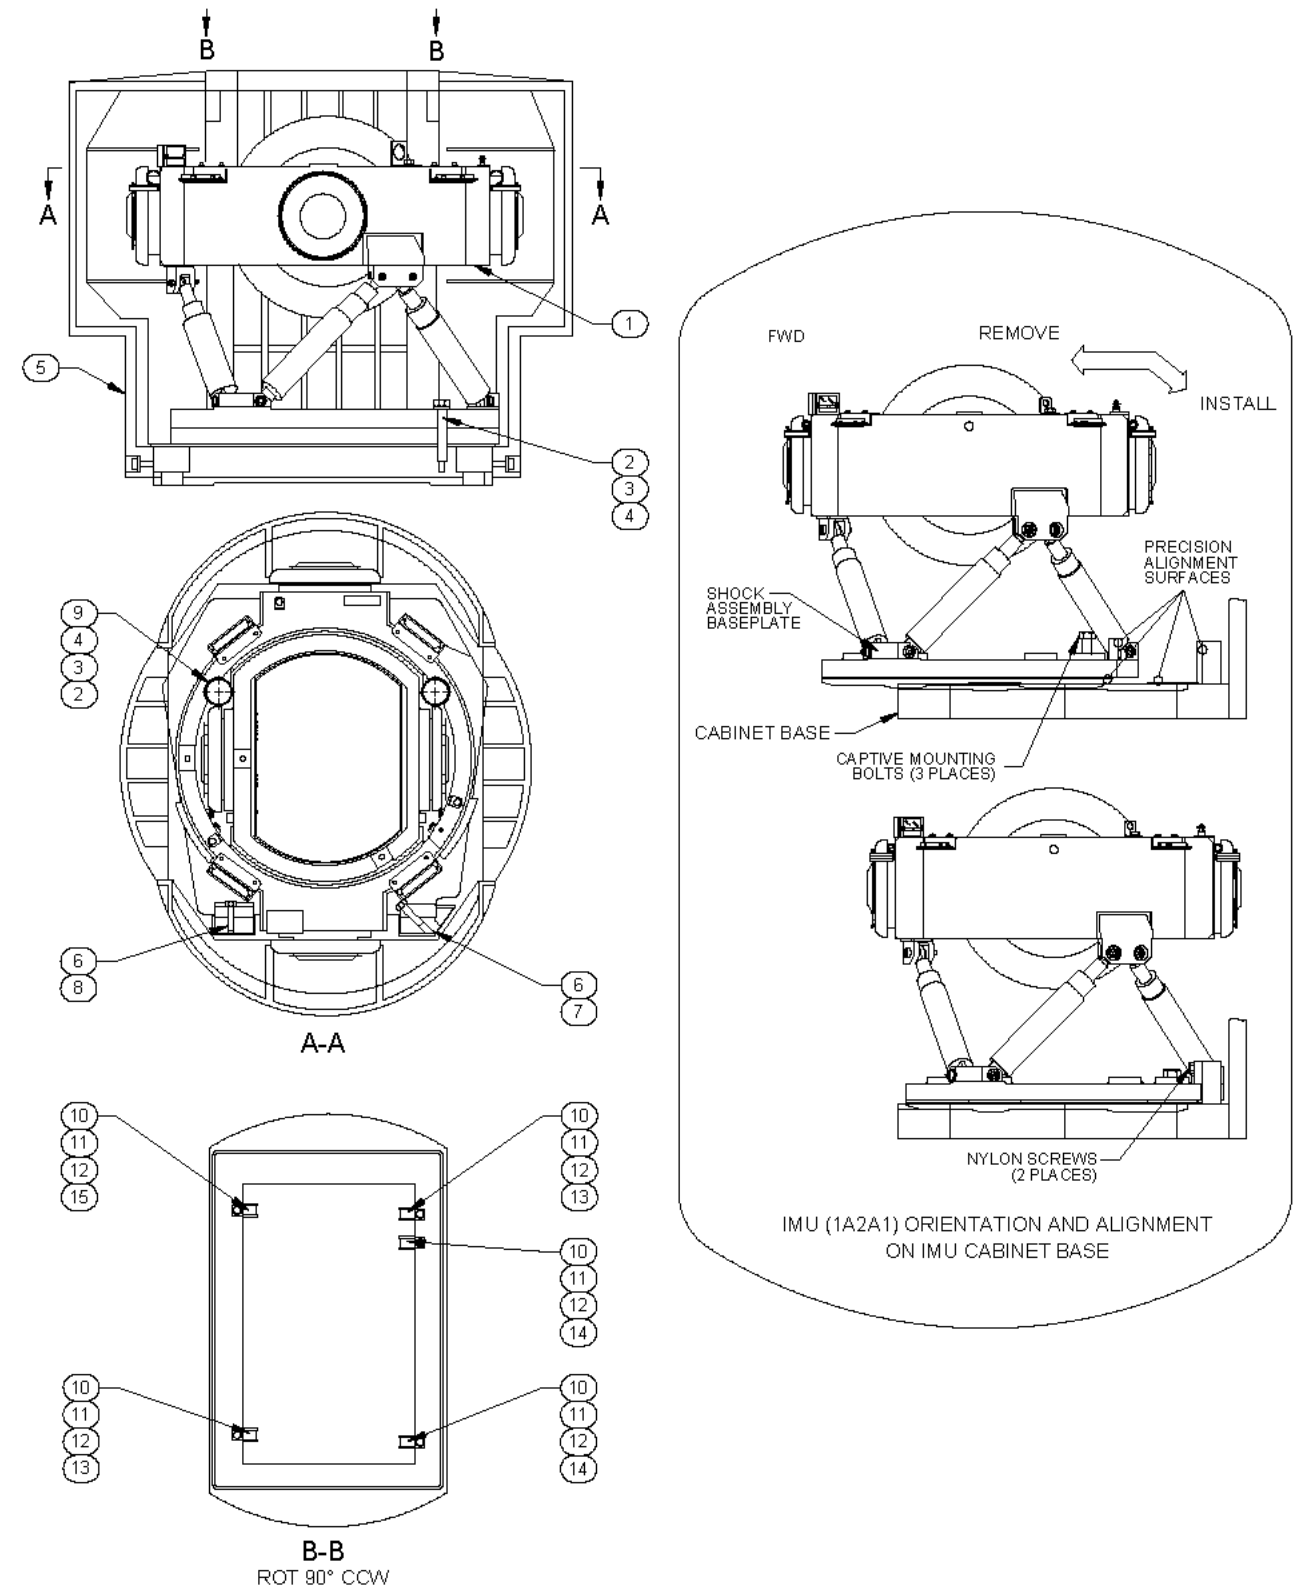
IMU: Measurement Cabinet Assembly (1A2) (Unit 2)
